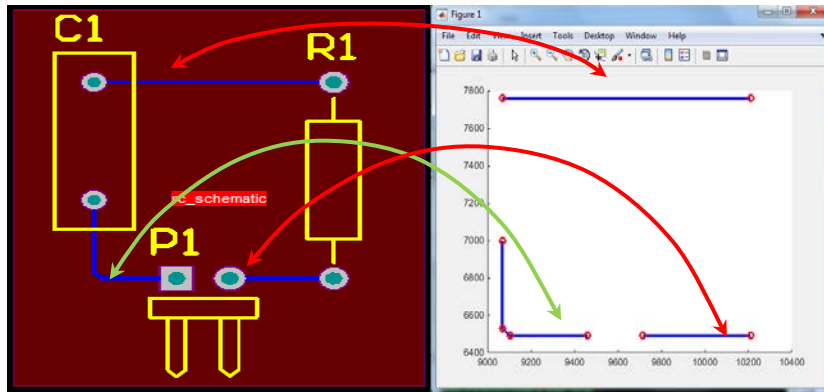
PCB generated from ALTIUM VS PCB generated after milling
